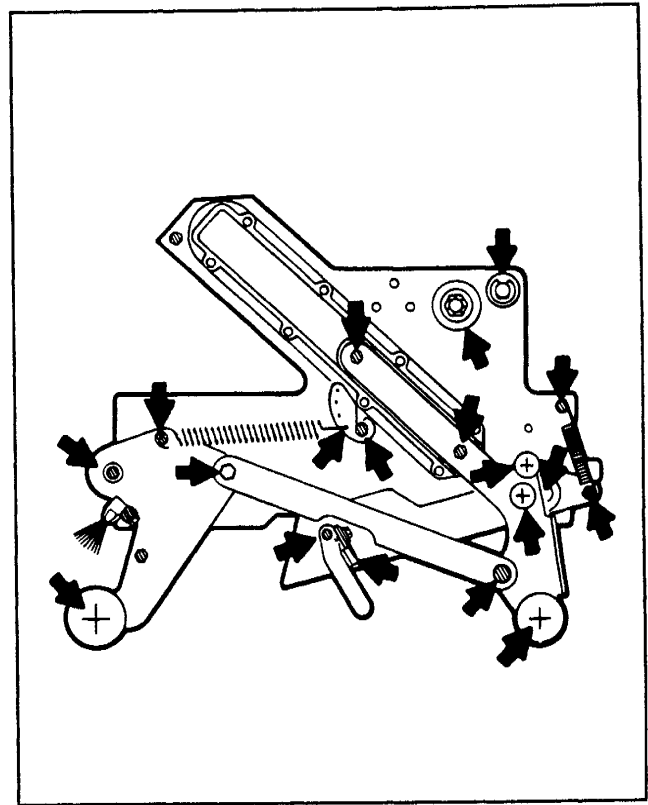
Lubrication Points - Top And Bottom Taping Head
